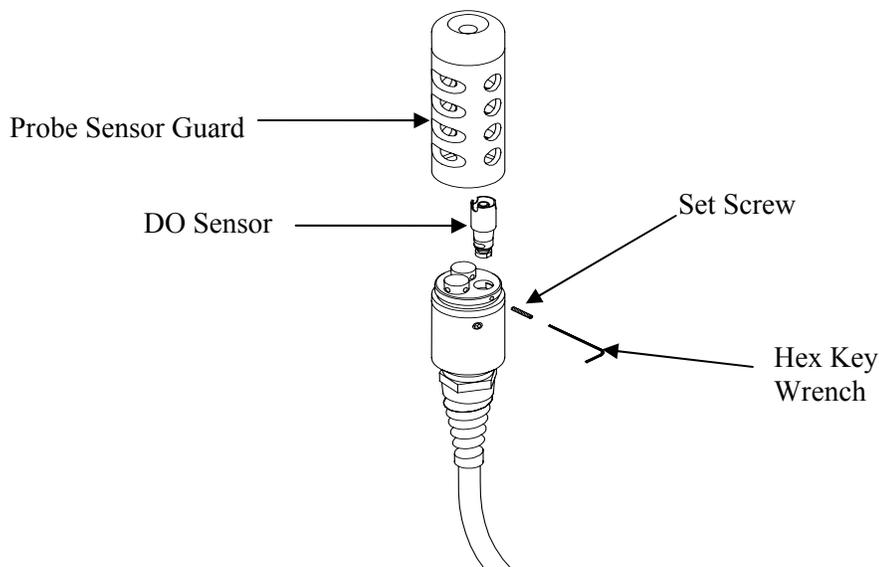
5562 Probe Module - DO Sensor Replacement
